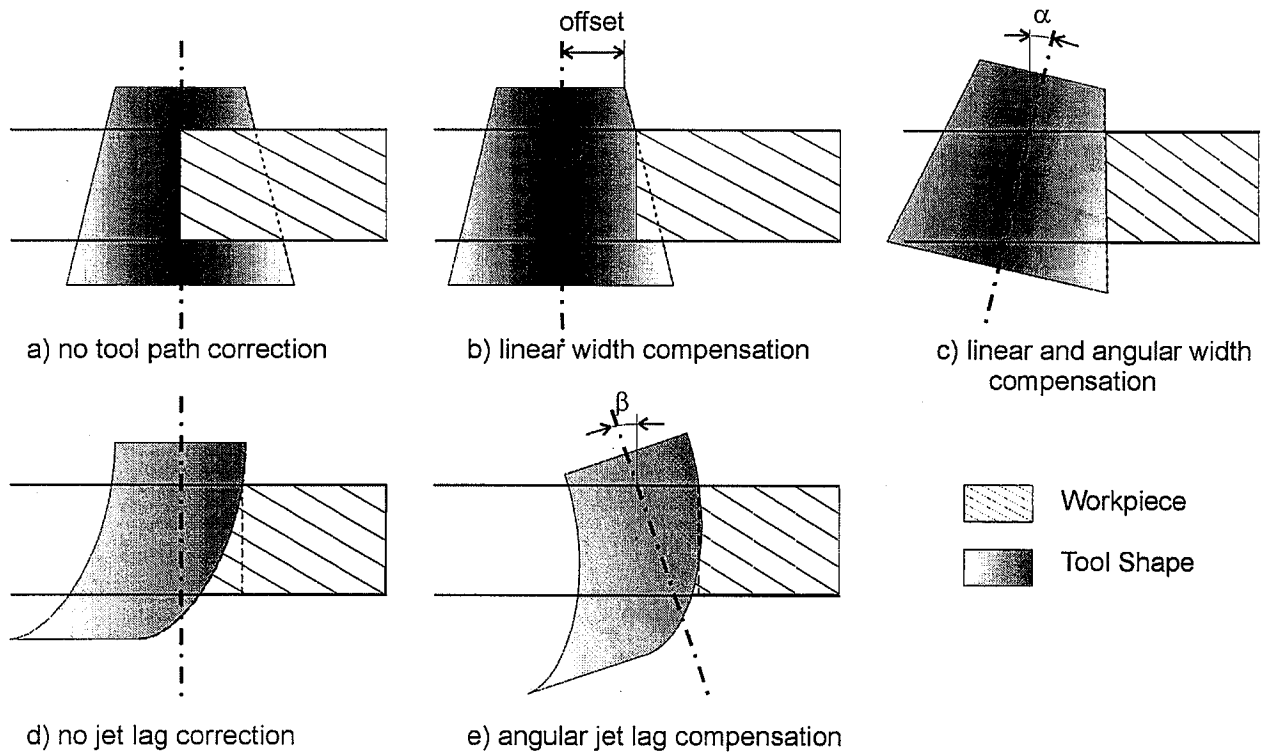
Linear and Angular Compensation of the Jet Tool Shape
